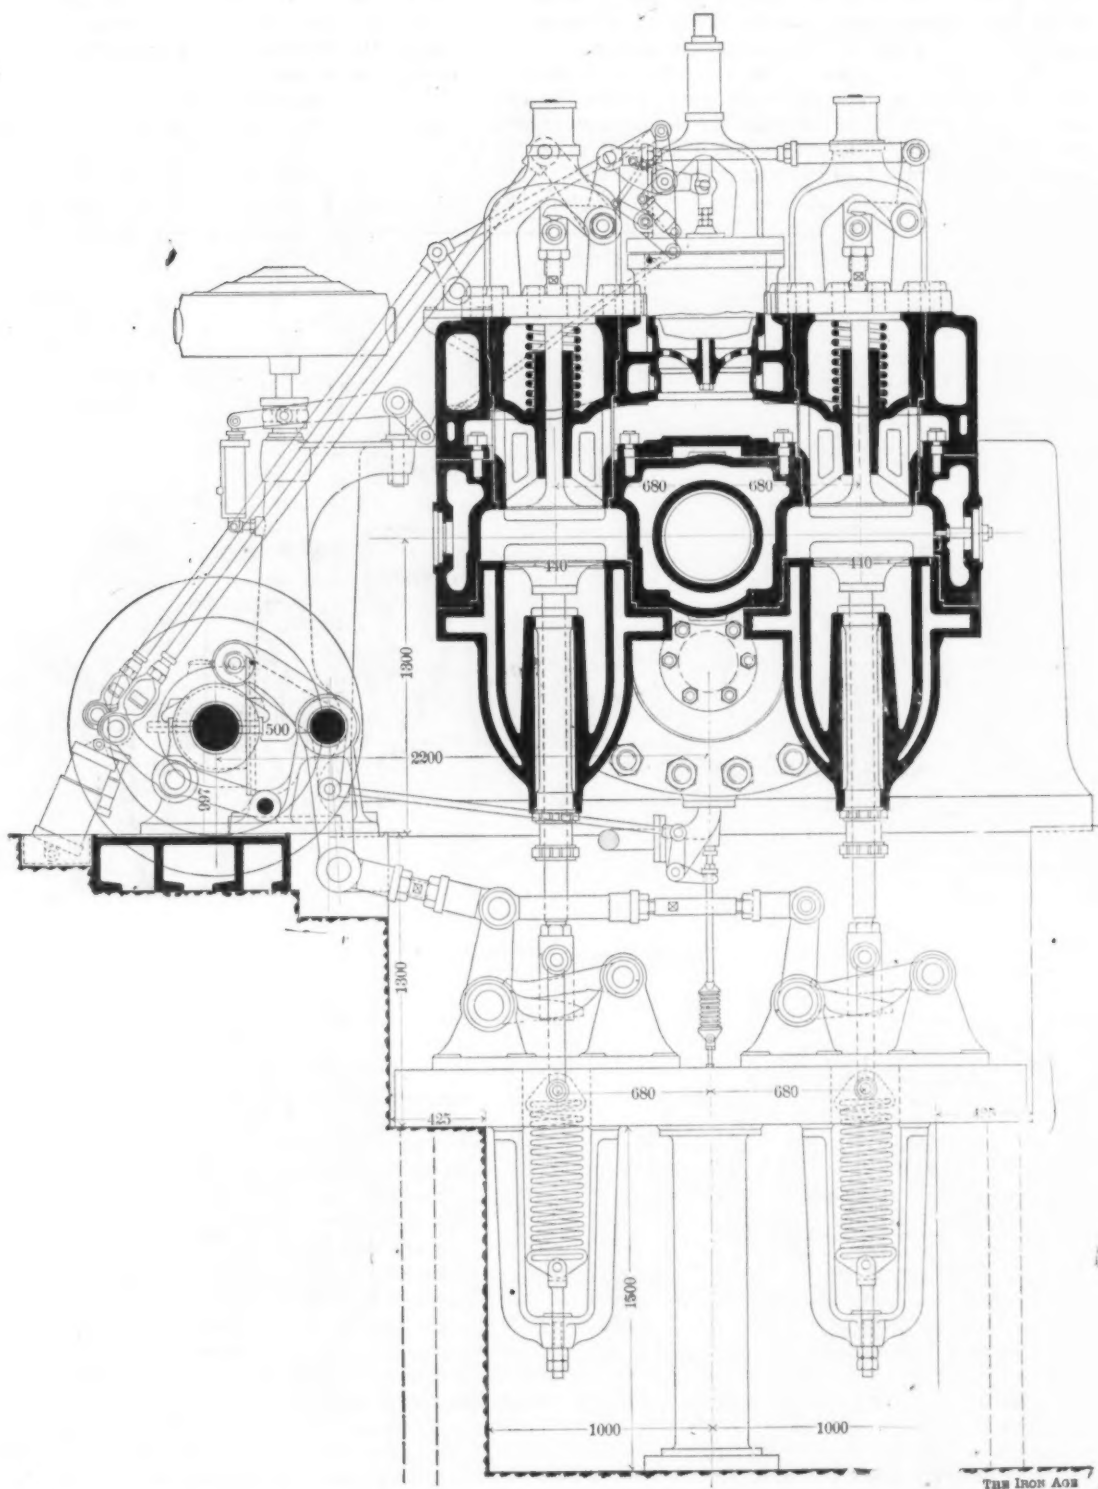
Valve Gear of 750 Horse-power Single Cylinder Nuernberg Gas Engine for Rheinische Stahlwerke.
